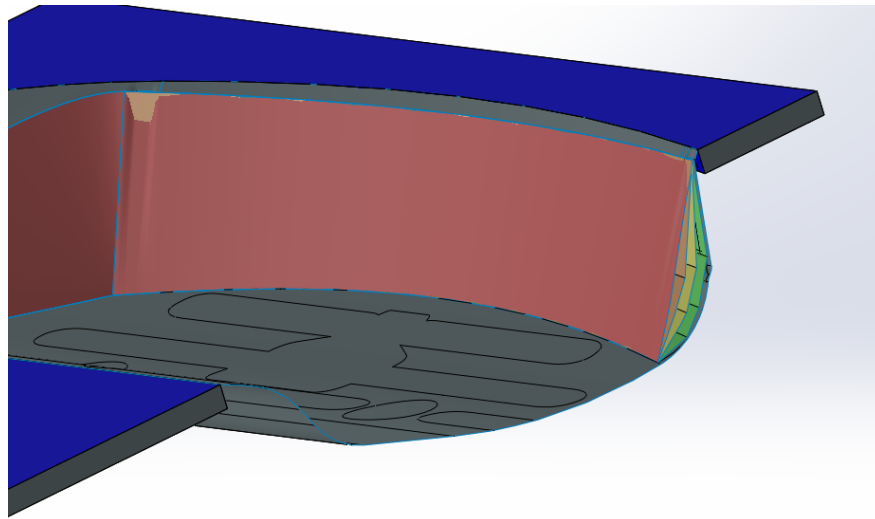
Cross section of the CAD model showing the four interim passes used to progressively form the final geometry for the third attempt at the seat base. All but the red surface were formed with bottom-up multi-pass forming.
